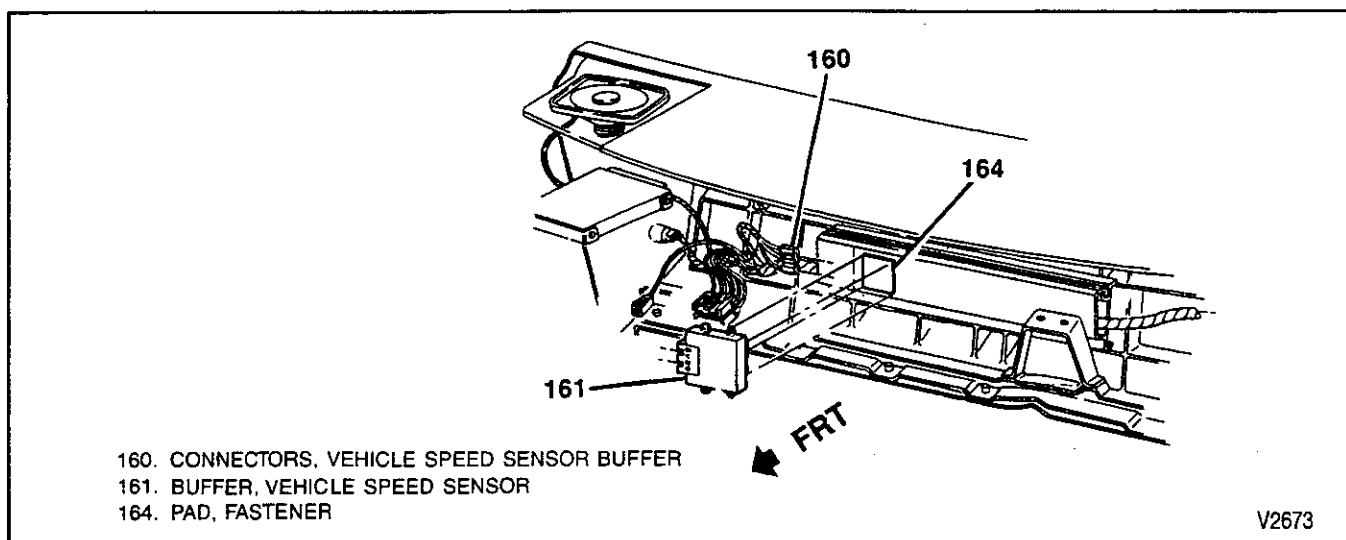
Vehicle Speed Sensor Calibrator (Buffer) Replacement
